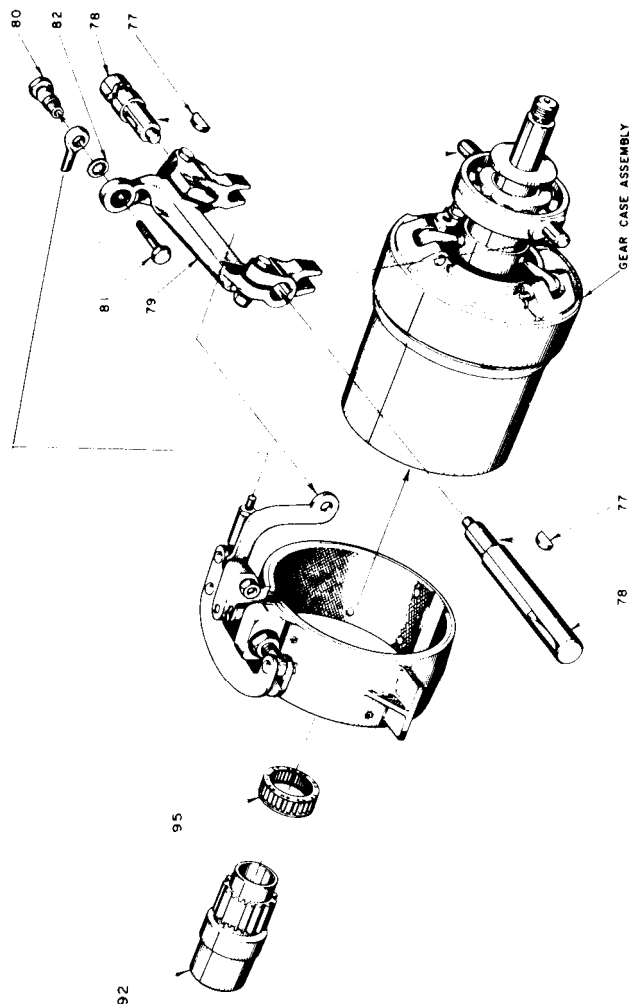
B—Exploded View of Reverse Brake Band and Toggle Operating Mechanism.
